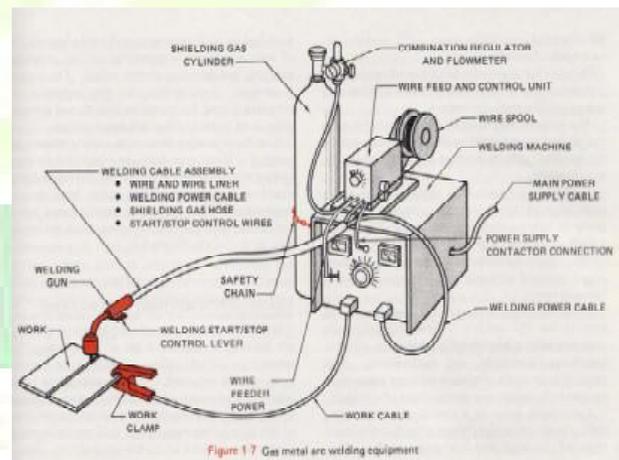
Gas Metal Arc Welding (GMAW)
